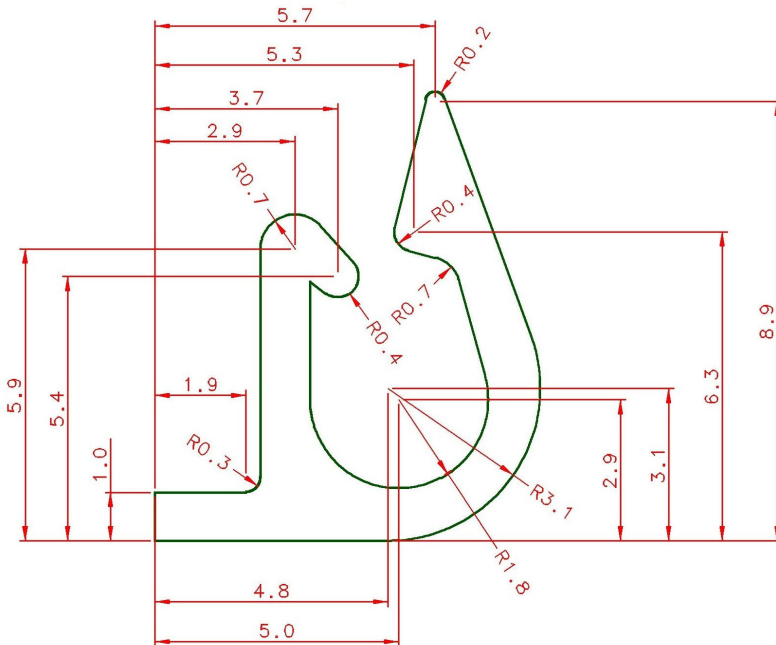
Snap fit geometry and dimensions, in millimeters.
